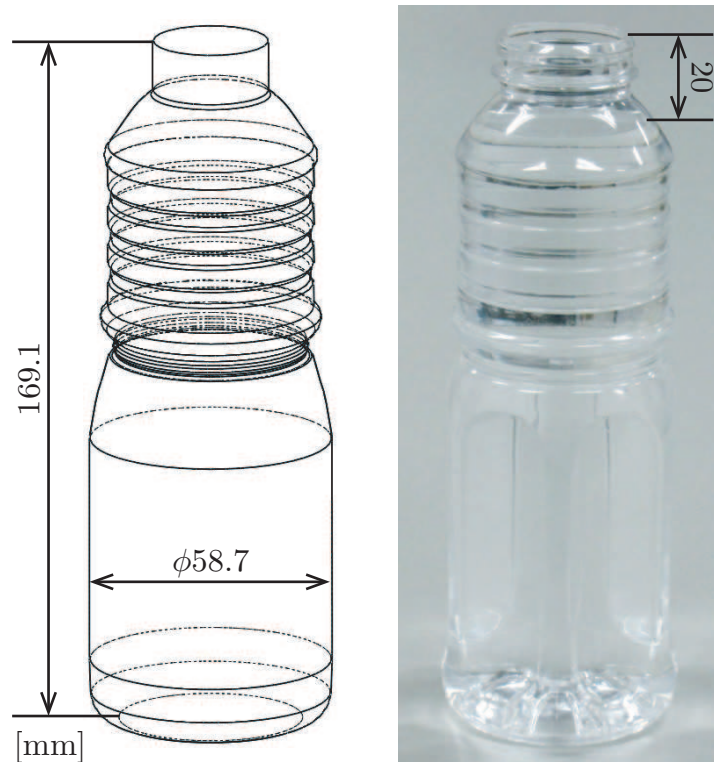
Bottle used in the intermittent conveyance bottling machine
